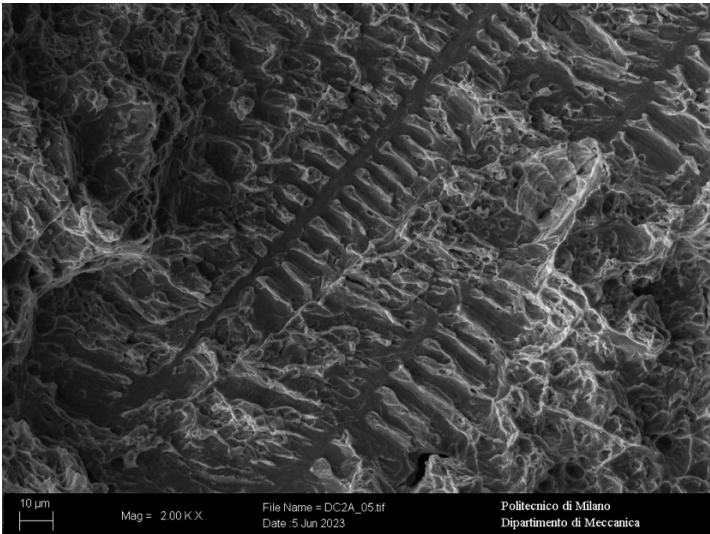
Dendrite detail on the fracture surface of the DC2 butt weld specimen
